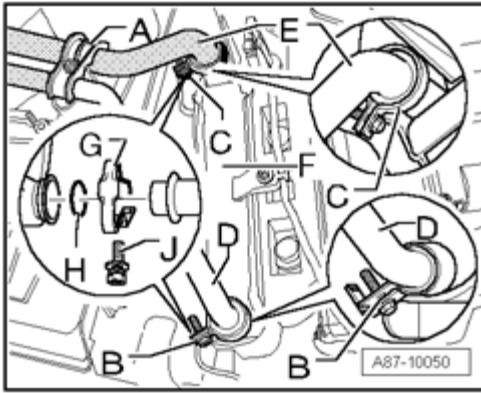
Identifying Coolant Pipes, Holder, Clamps, And Heater Core
